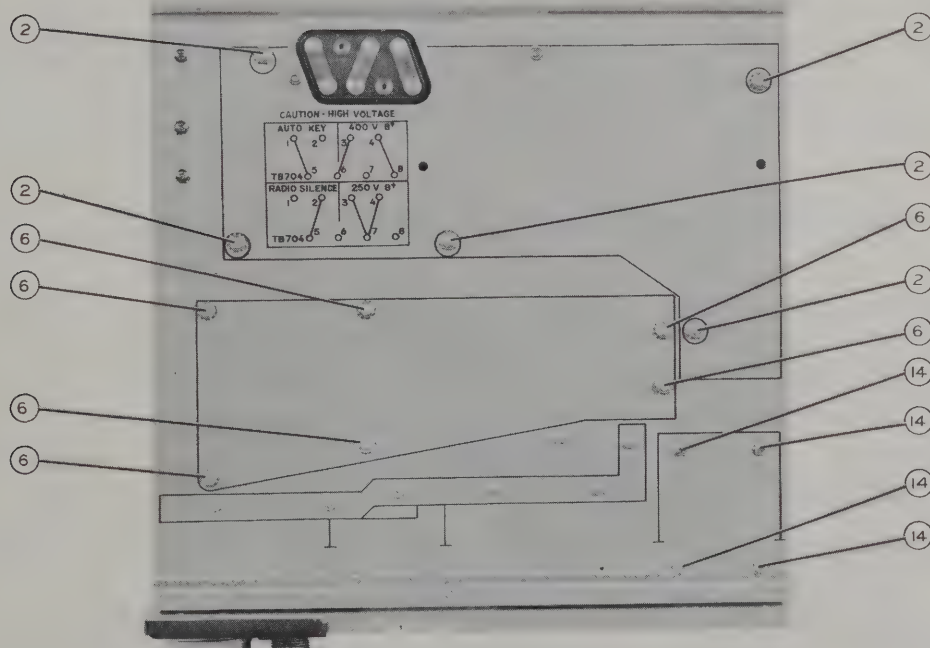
Main Chassis, Bottom View, Subassembly Removal Points
